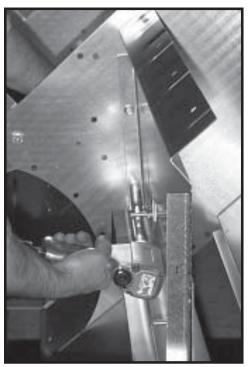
Tightening bolts on meter roll upper shield assemblies.
